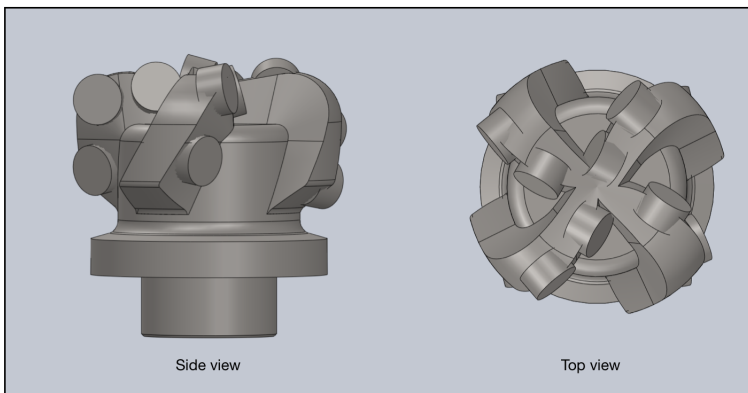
Side (left) and top (right) view of the bit showing how sockets that will hold the PDC cutters are created.
